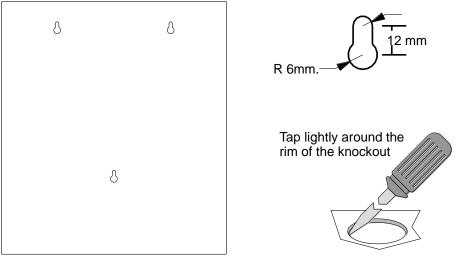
Example SP1X Back Pan Mounting Hole & Removing Knockouts
